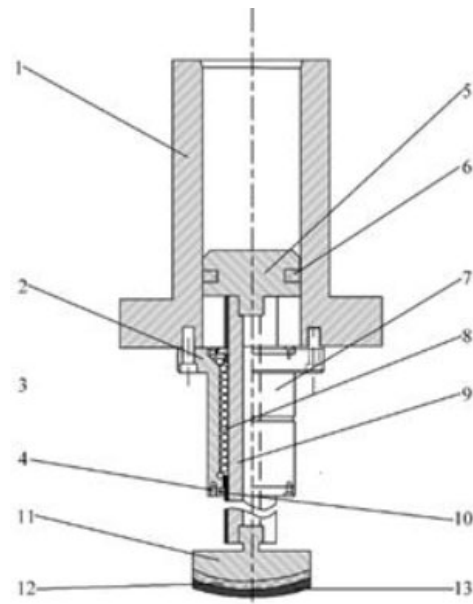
An in-line multi-cylinder adaptive polishing head 1- flange base, 2- o-type sealing ring, 3- chamber cover plate, 4- sub cylinder, 5- inline multi cylinder structure, 6- sub piston base, 7- sub grinding head base, 8- sub grinding head polishing mold, 9- fastening bolts.
